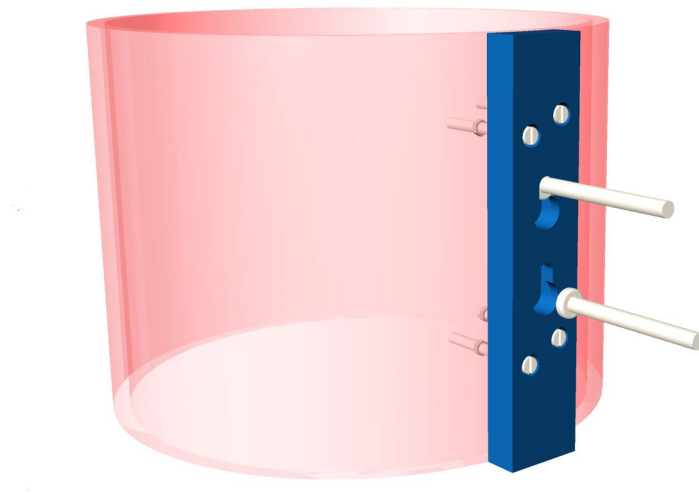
The mount (blue) displayed on a drum, with bolts and screws.
